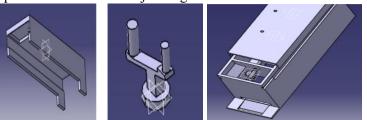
Cover, Locking Mechanism and Assembled locking mechanism
